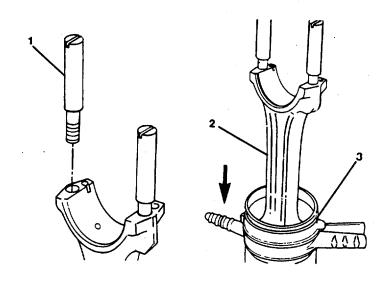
Connecting Rod Guide Pins and Piston Ring Compressor.
